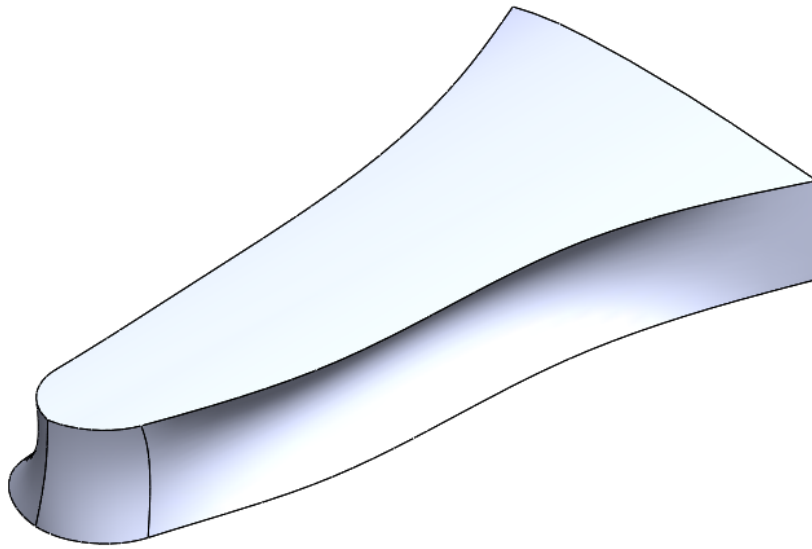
Aluminum AM Model of Local TO Integrated With Fuel Tank with Top Skin Removed
